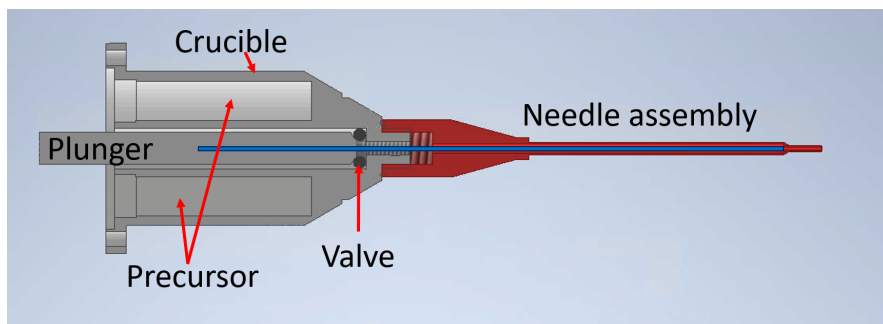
CAD drawing of the GIS needle assembly along with the proposed extension of the plunger (shown in blue).
